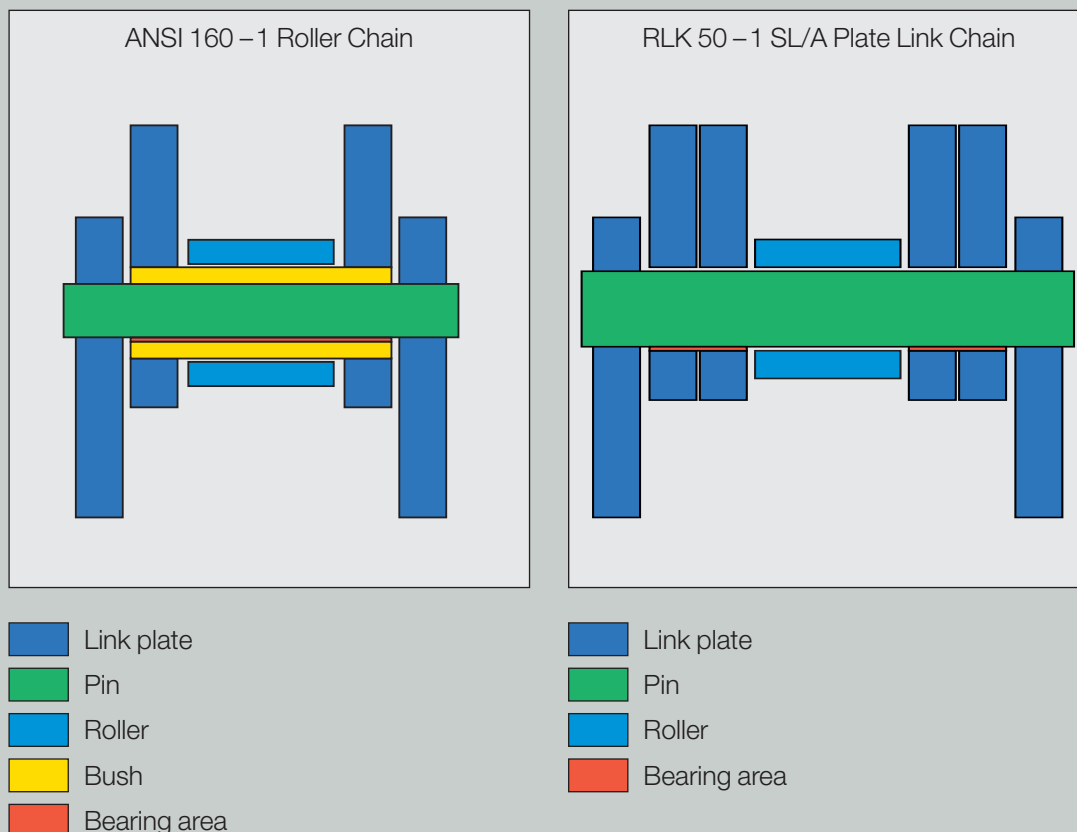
Sectional drawing of a roller chain and a plate link chain.
